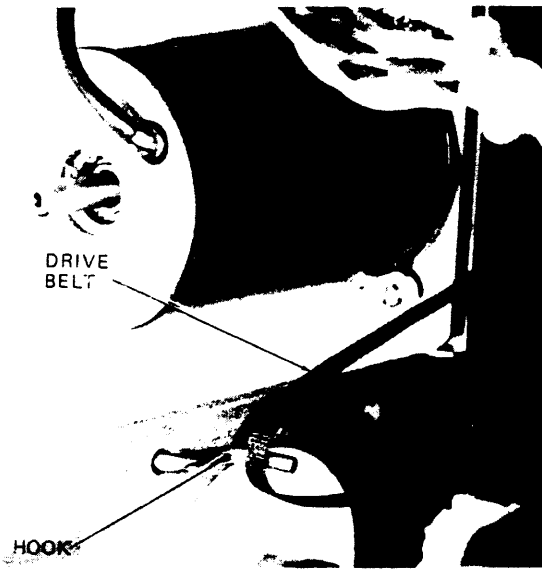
RIGHT DRIVE BELT REMOVAL
